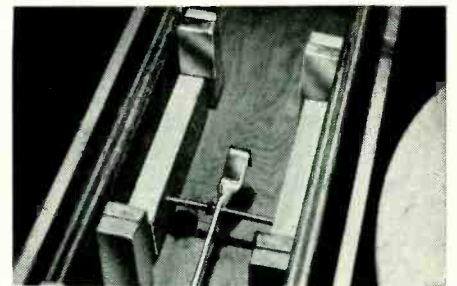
Detail diagram showing assembly of rotatable turntable in center of work surface.
